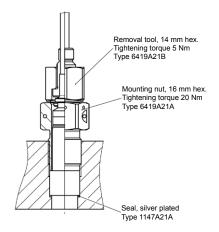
Installation with mounting adapter Type 6419A21A, seal Type 1147A21A, and removal tool Type 6419A21B
